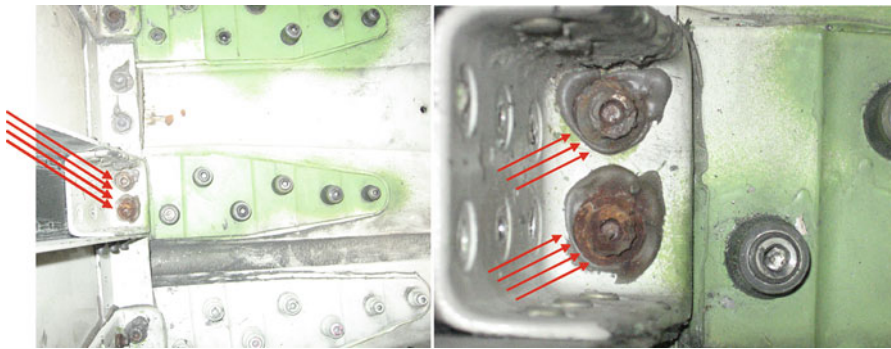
Corroded fasteners due to sealant deterioration
